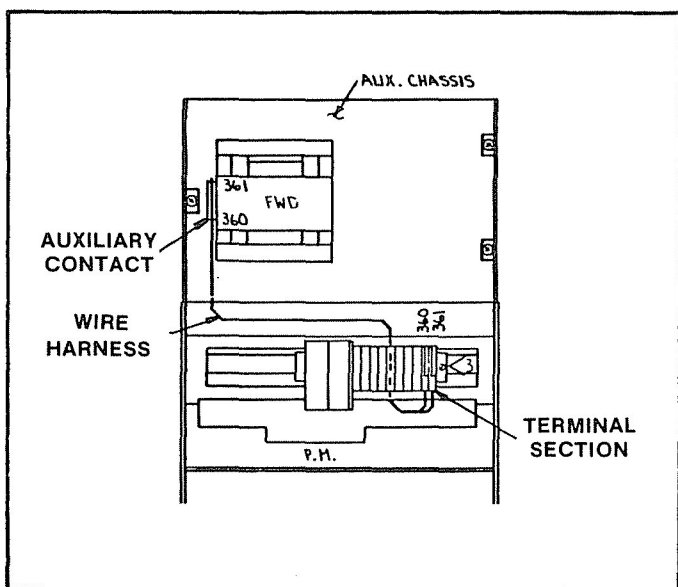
3-40 hp @ 460VAC, 15-20 hp @ 230VAC Unidirectional Auxiliary Contact Kit Installation
